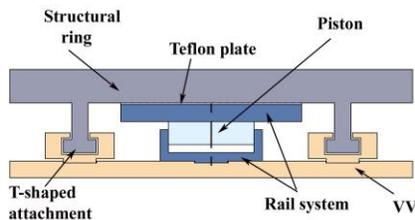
Cross-section of T-shaped attachments and rail system (1/16 sector)
